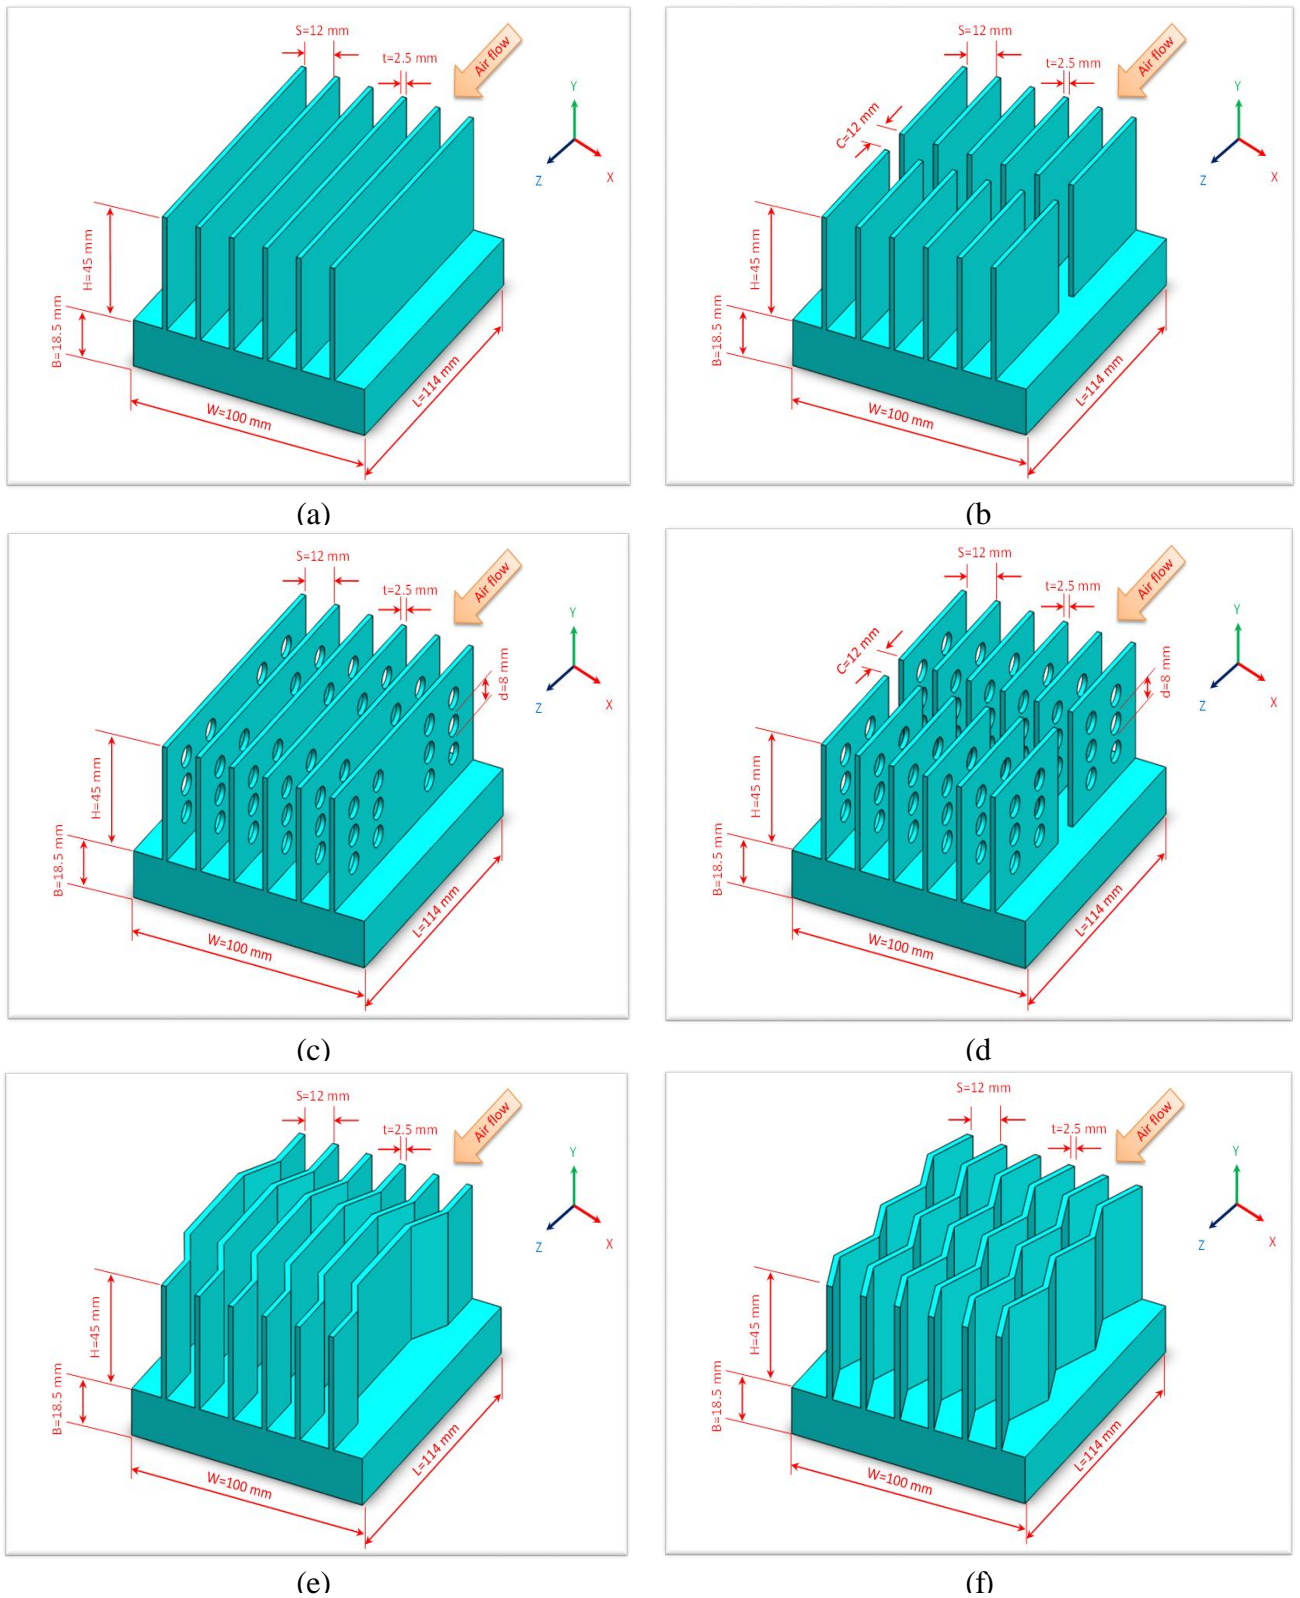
The geometry of the heat sinks: a-flat plate, b- cross-cut, c- perforated, d- perforated cross-cut, e- serpentine and f- zigzag.
